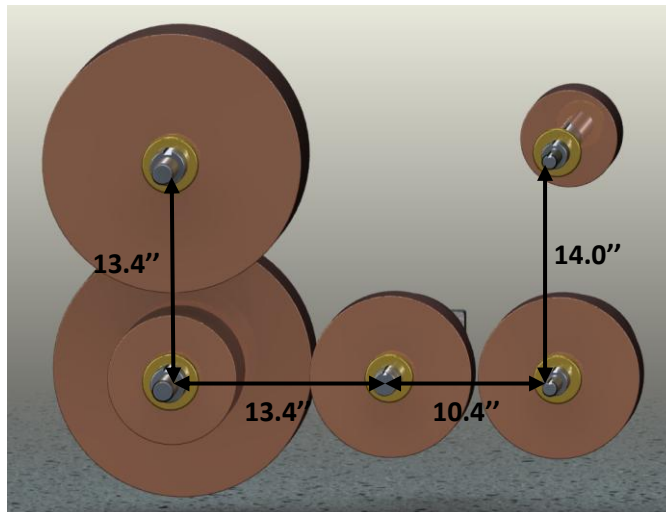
Shaft spacing of mechanical input assembly (rear view) [4].
